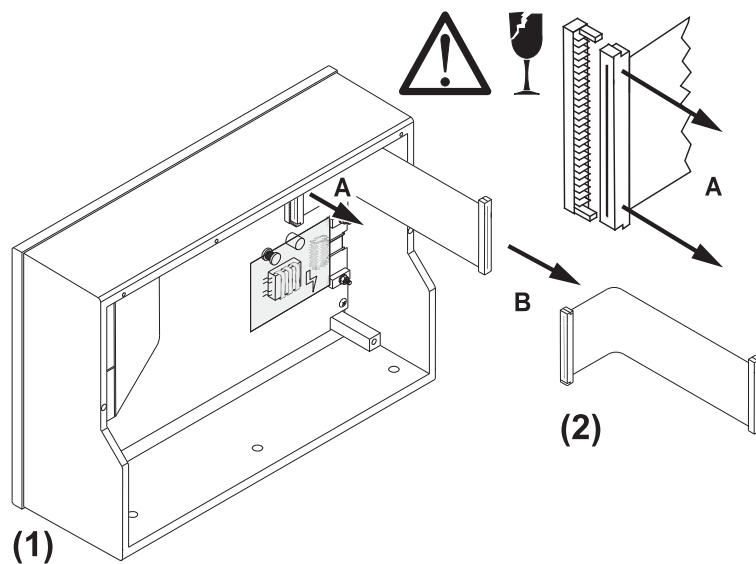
Removal of the connecting flat cable from the display pcb
